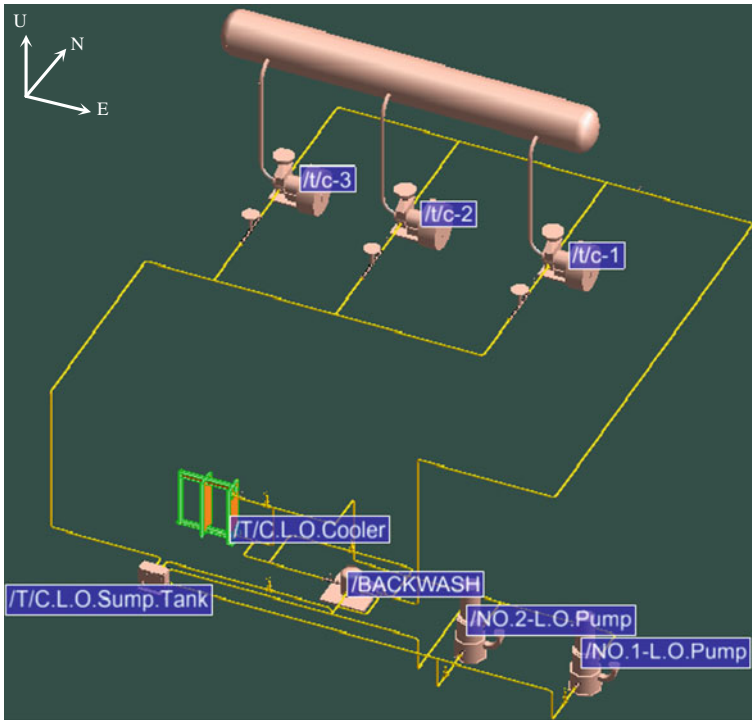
Equipment connectivity model of the main engine turbocharger lubricating oil system
